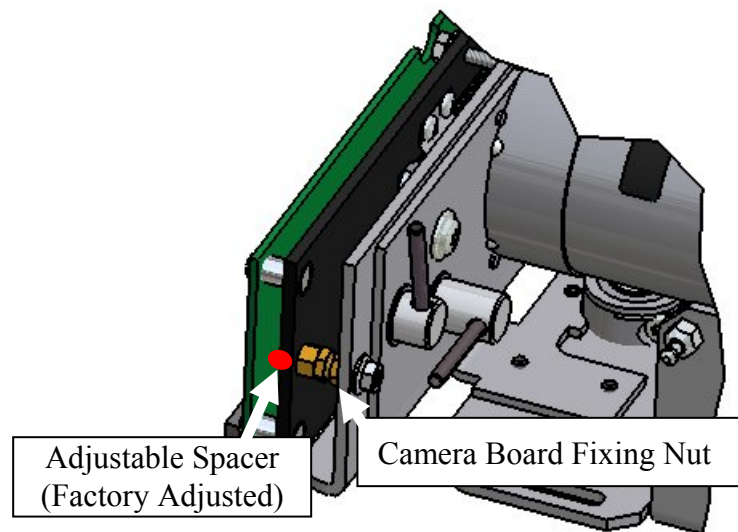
, Adjustable Spacer for Camera Board Tilt
